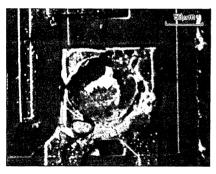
Enlarged micrograph of corroded Aluminum bonding pad
